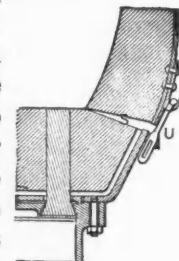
HOLLEY'S EXTERNALLY RAMMED BOTTOM-JOINT.
